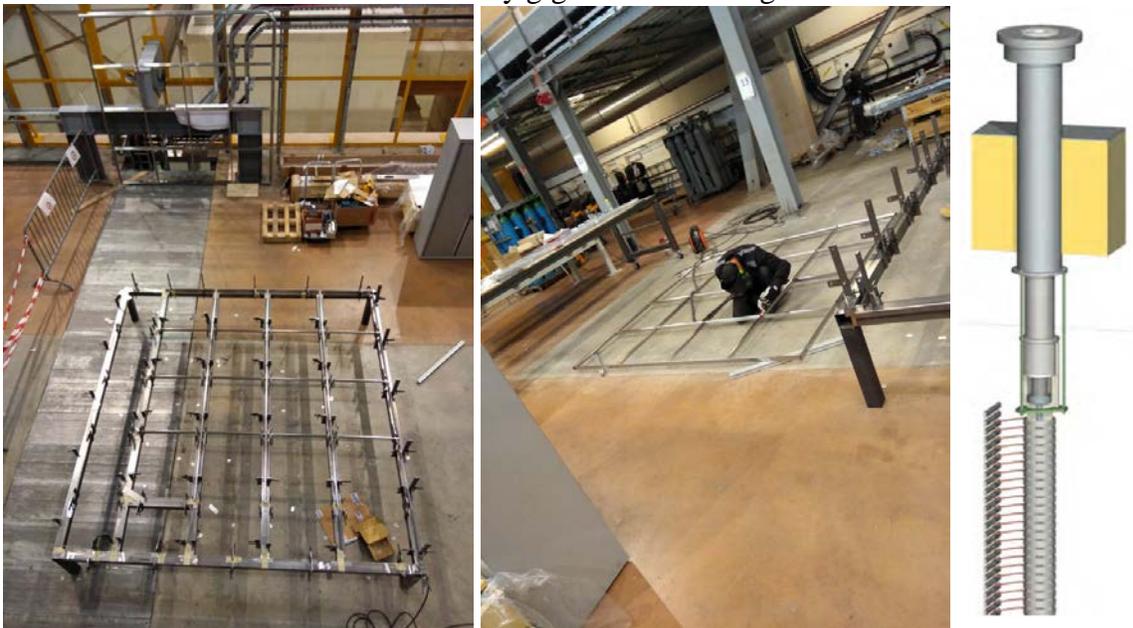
Left and center: construction and welding of one module of the ProtoDUNE-DP cathode. Right: design of the extender connected between the HV feedthrough and field cage rings.
